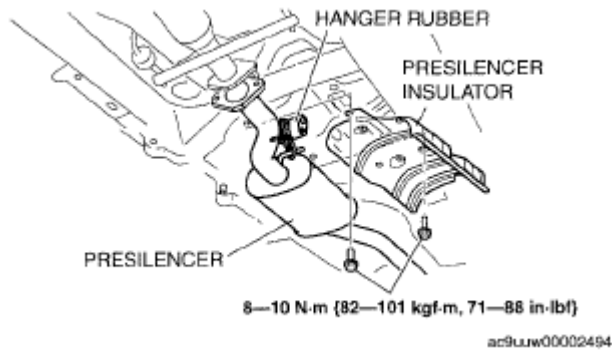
Identifying Hanger Rubber, Presilencer Insulator & Torque Specifications
